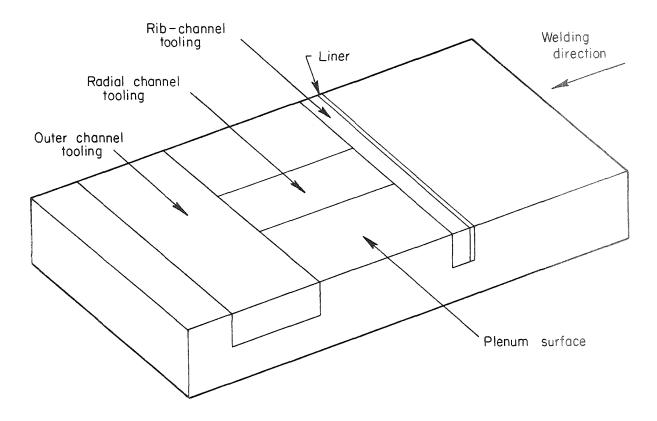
COMPOSITE BASE PLATE USED IN SIMULATED END-COVER-WELDING EXPERIMENTS
